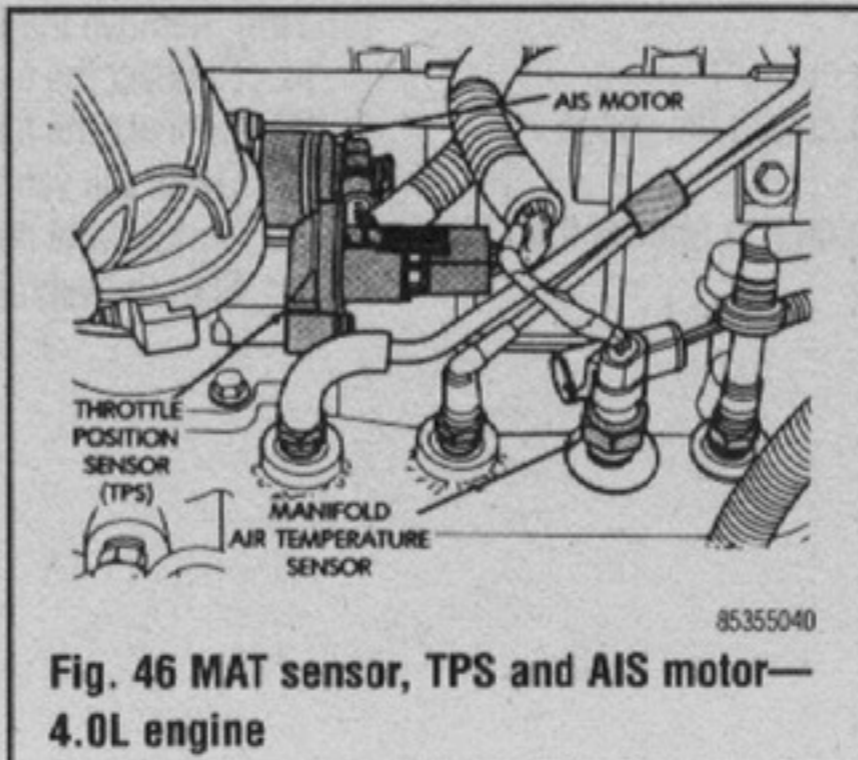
MAT sensor, TPS and AIS motor—4.0L engine
